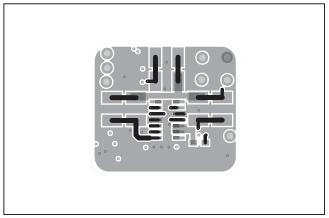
MAX30102 Daughter Board Component Placement Guide—Solder Side
